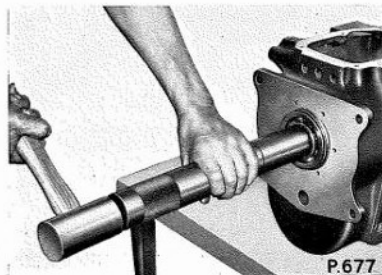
Refitting the assembled primary shaft in the gearbox casing using the hollow drift of Churchill Tool R.G.77 with the extension adaptor R.G.77-1.
